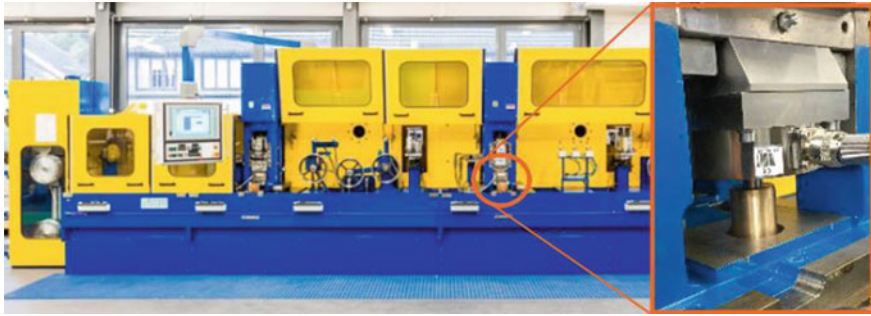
Integration of rolling mill and piezoelectric actuator [9]
